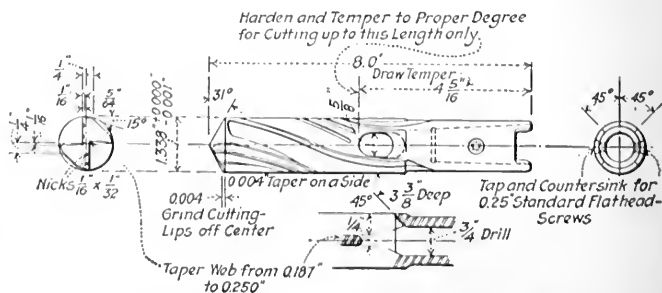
DETAILS OF 1.338-IN. HOLLOW-SHANK HIGH-SPEED STEEL DRILL
